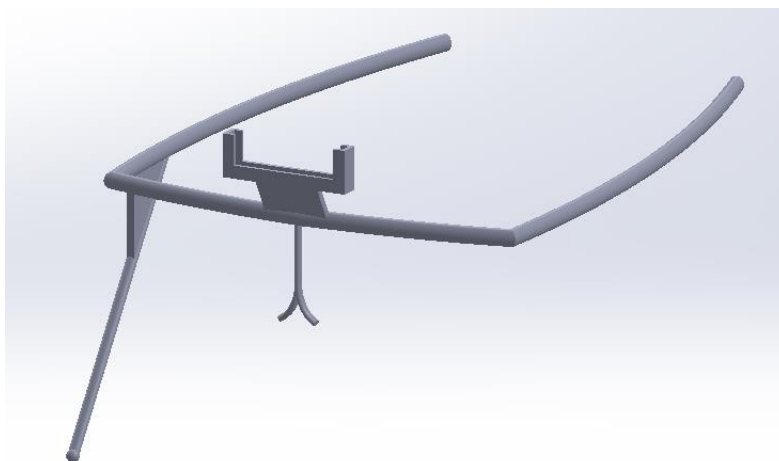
Preliminary Design Drawing for Mounting Platform.
